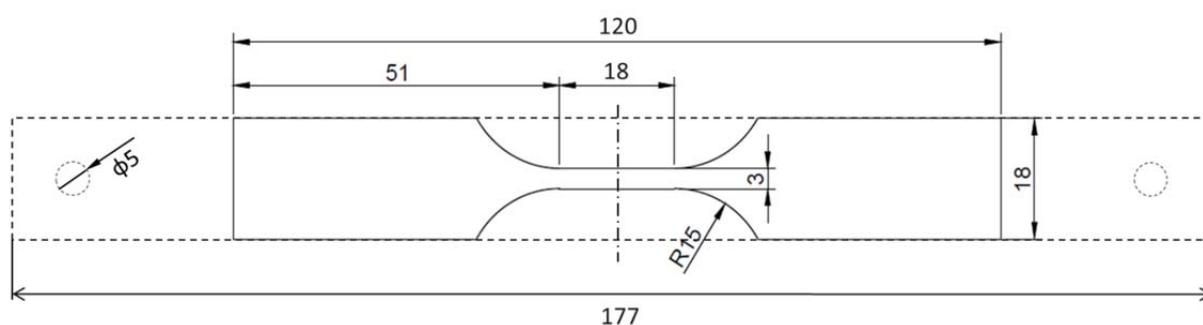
Design of specimens (dimensions are in mm) for quasi-static tensile testing (solid line) and Gleeble heat treatments (dash line)
